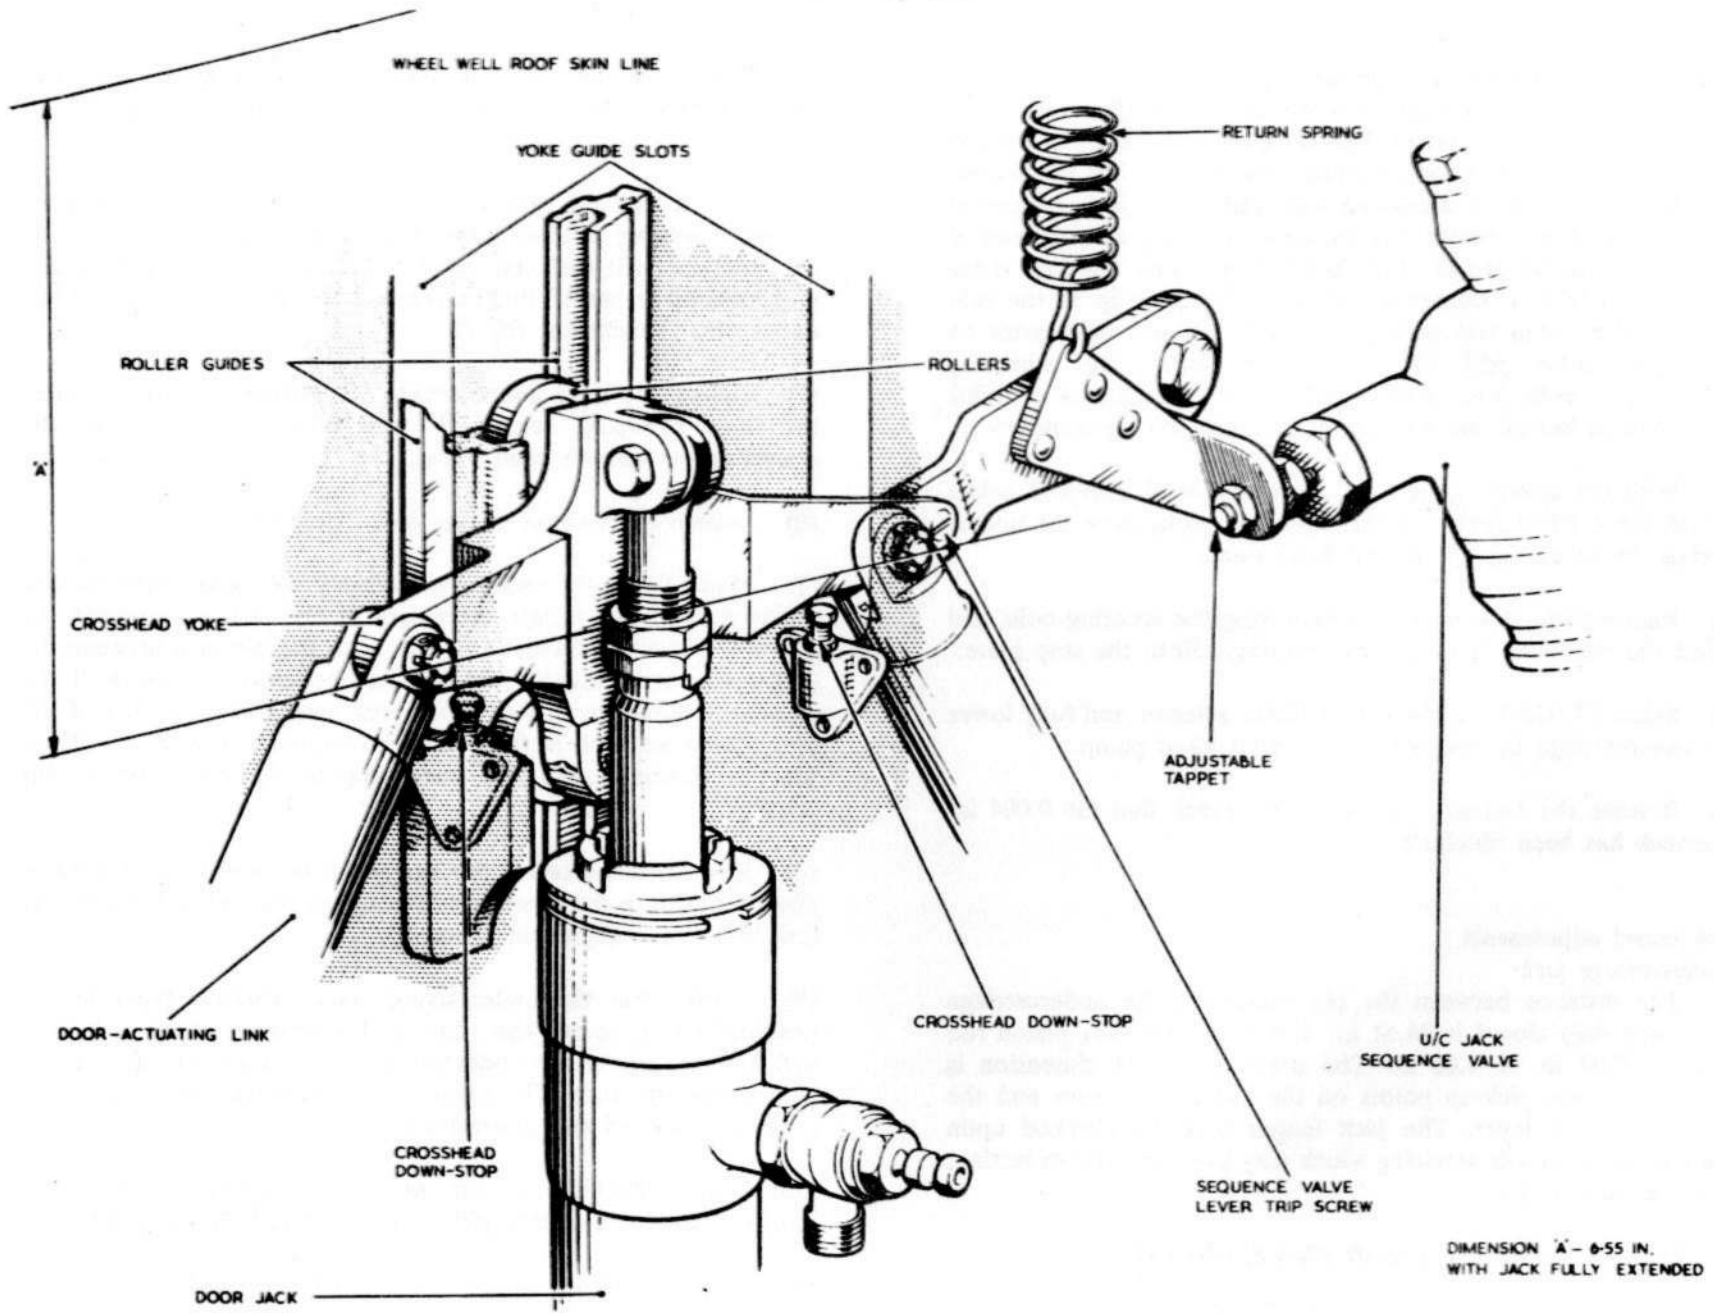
DOOR JACK CROSSHEAD ARRANGEMENT
